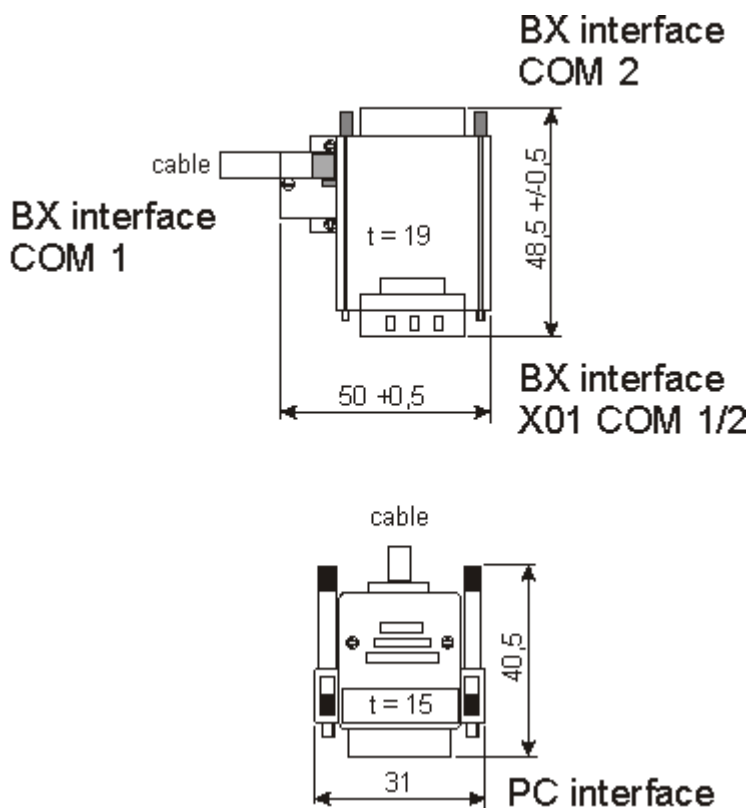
Programming cable ZK1000-0030 - plug connector dimensions
